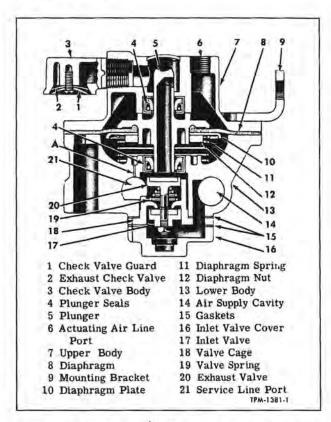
Rear Brake Relay Valve (Midland-Ross)
